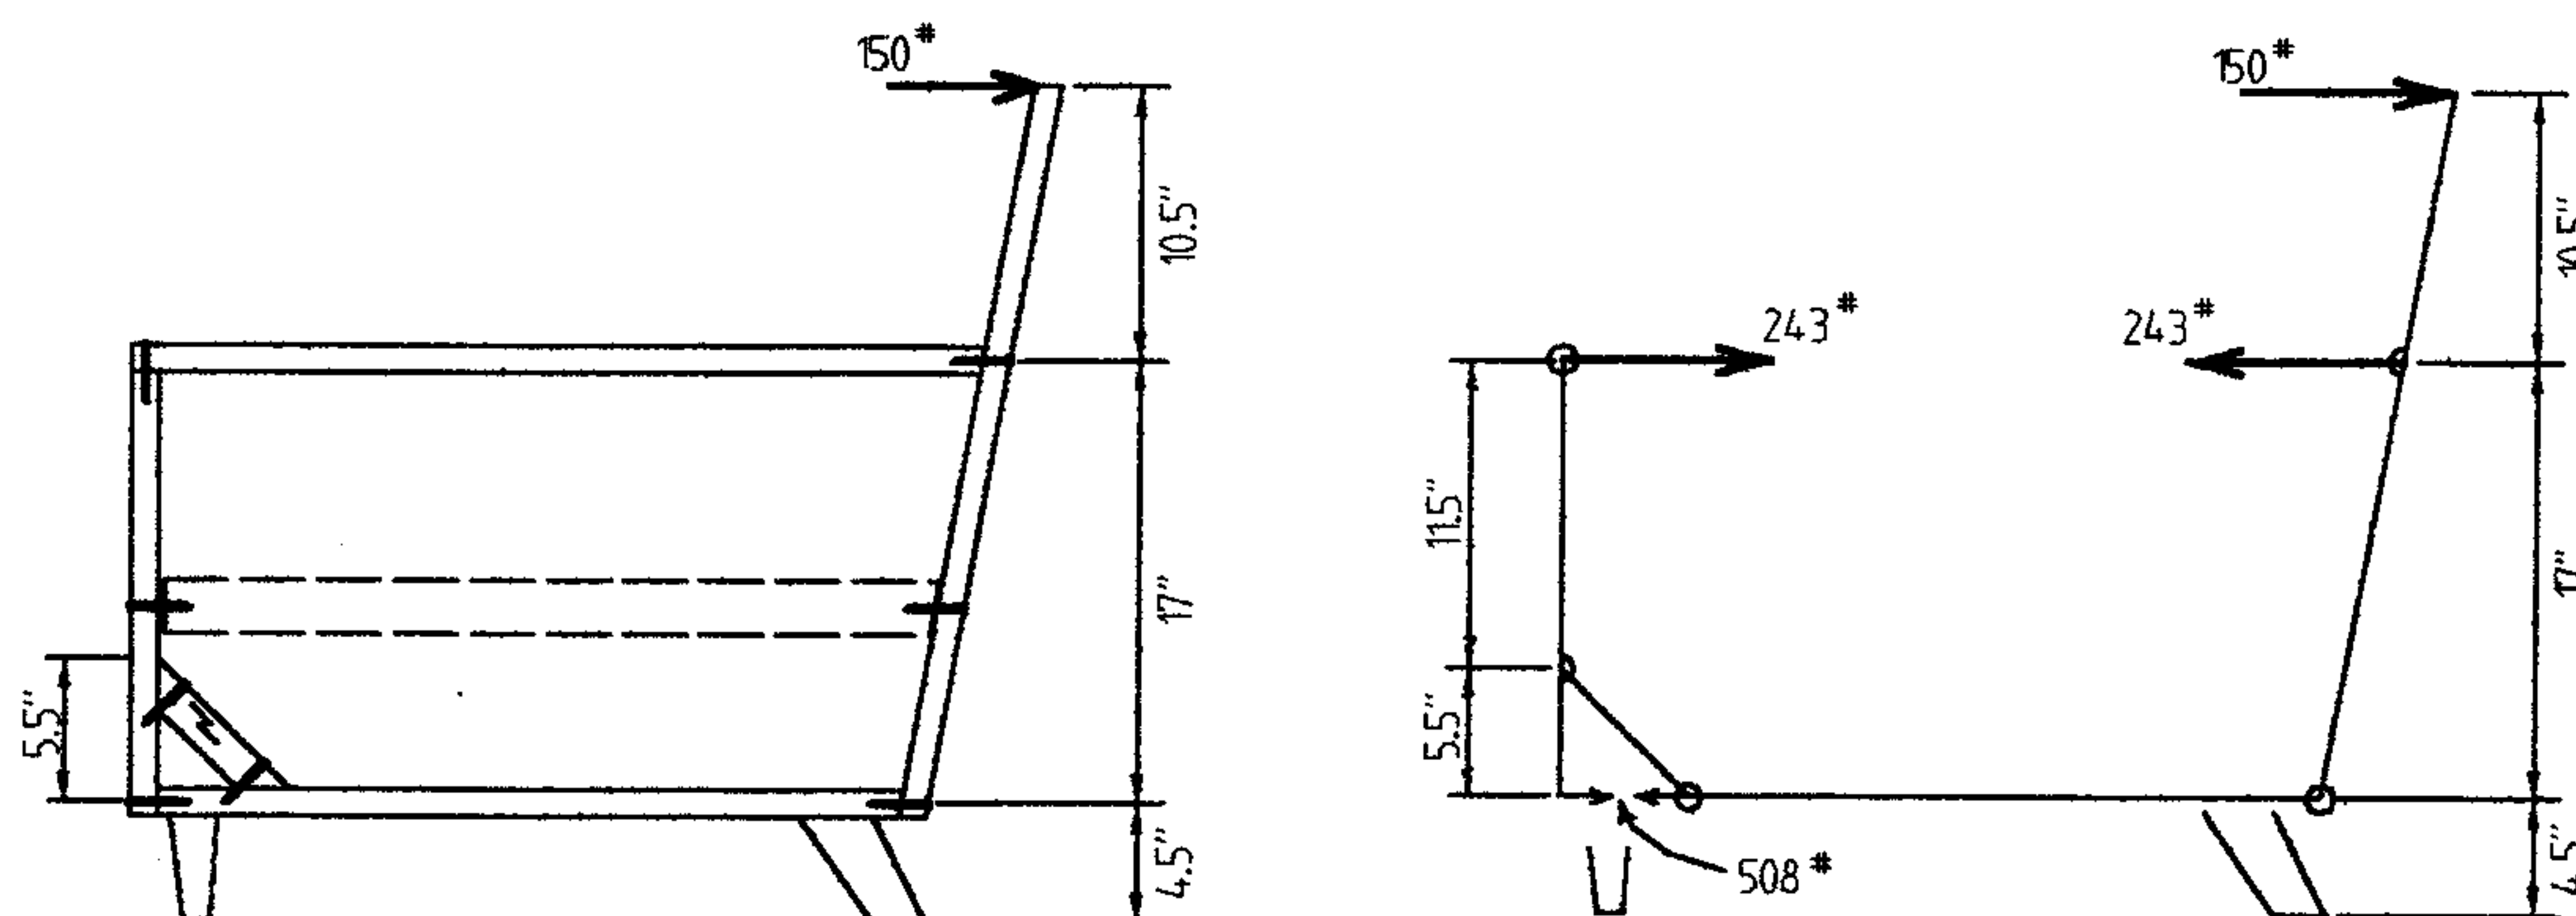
Design of sofa side frame constructed with screws as primary connectors (left); internal forces acting along longitudinal axes of arm and side rail (right)
